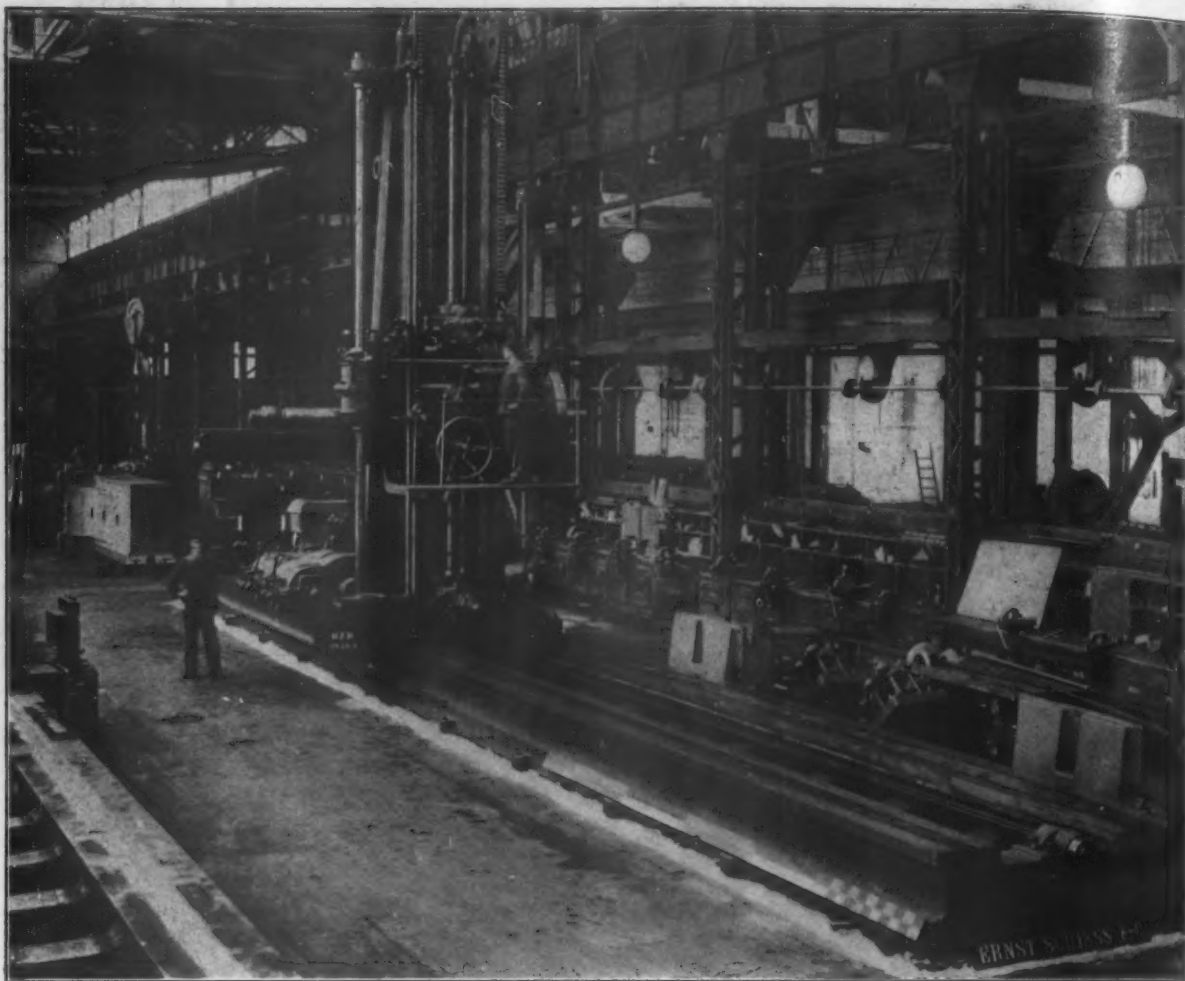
Horizontal Boring and Milling Machine with a 67 ft. 7 in. x 6 ft. 7 in. Bed.
